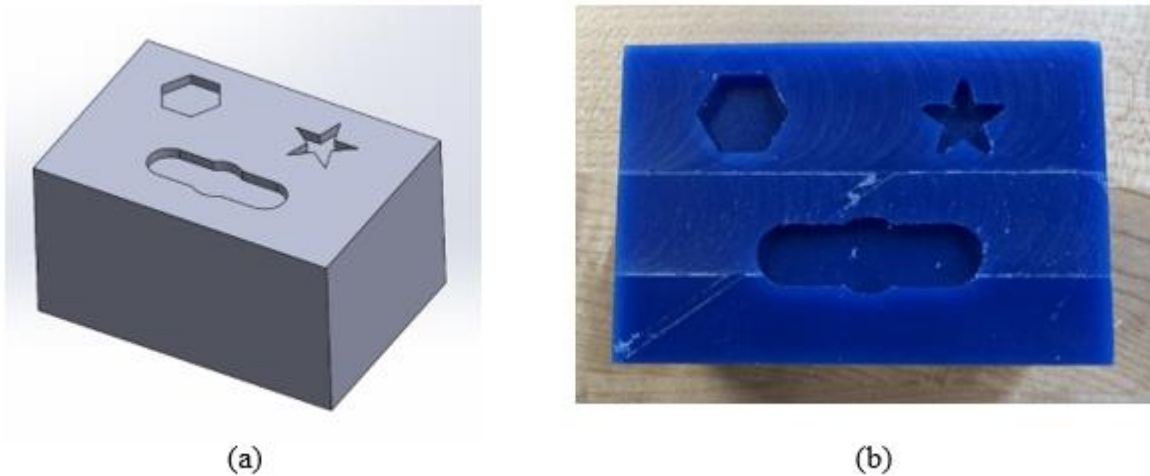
(a) Solidworks Model of Irregular Pockets and (b) Machined Parts
